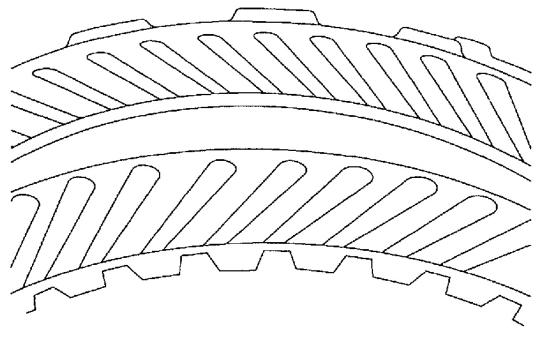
Installing Direct Clutch Piston Retaining Ring
